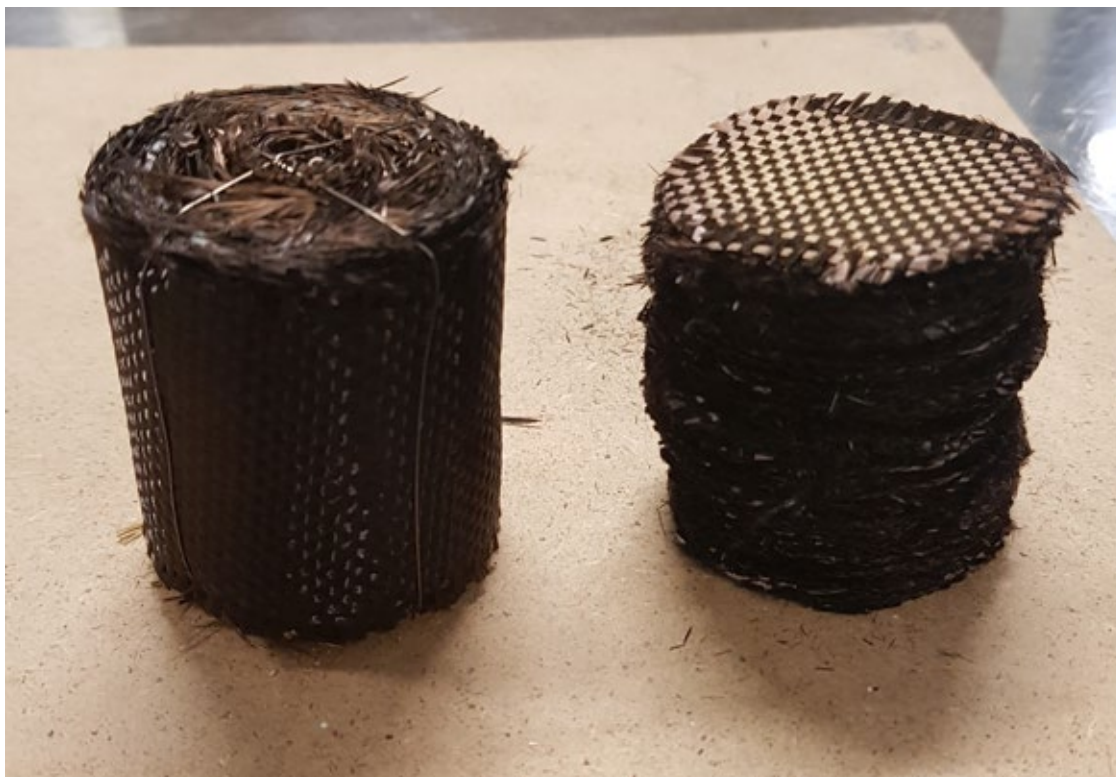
Left specimen constructed by rolling the material. Right specimen constructed with discs. Both specimens are after test.
